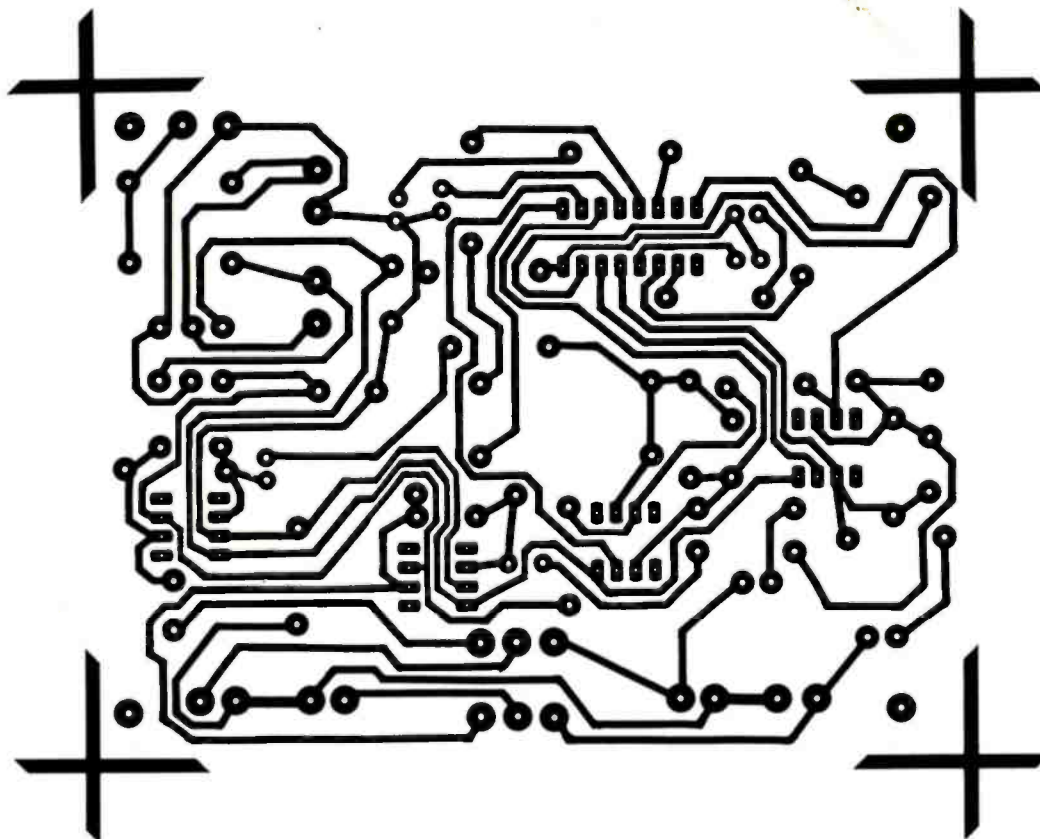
The *doughnuts* in the corners indicate the locations for the printed-circuit board's mounting screws. Simply use a drill bit that matches the screws.
